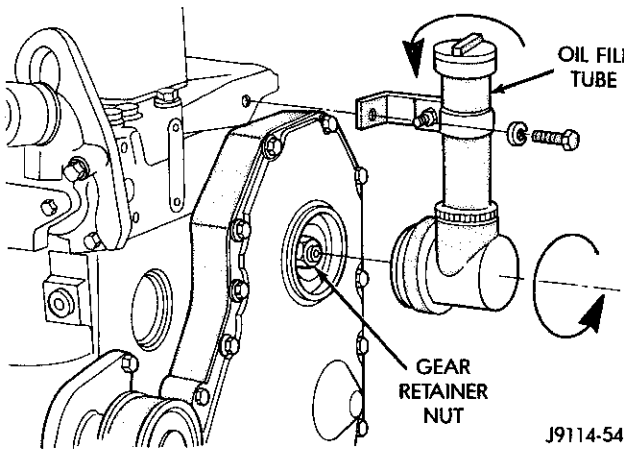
Oil Fill Tube, Adapter and Mounting Bracket
